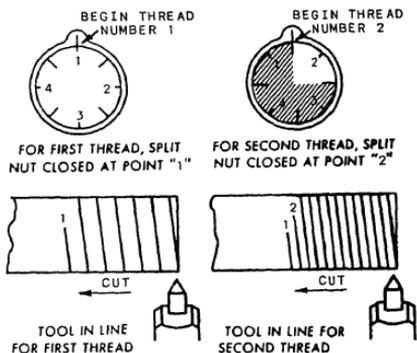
Cutting multiple threads using the thread-chasing dial.
